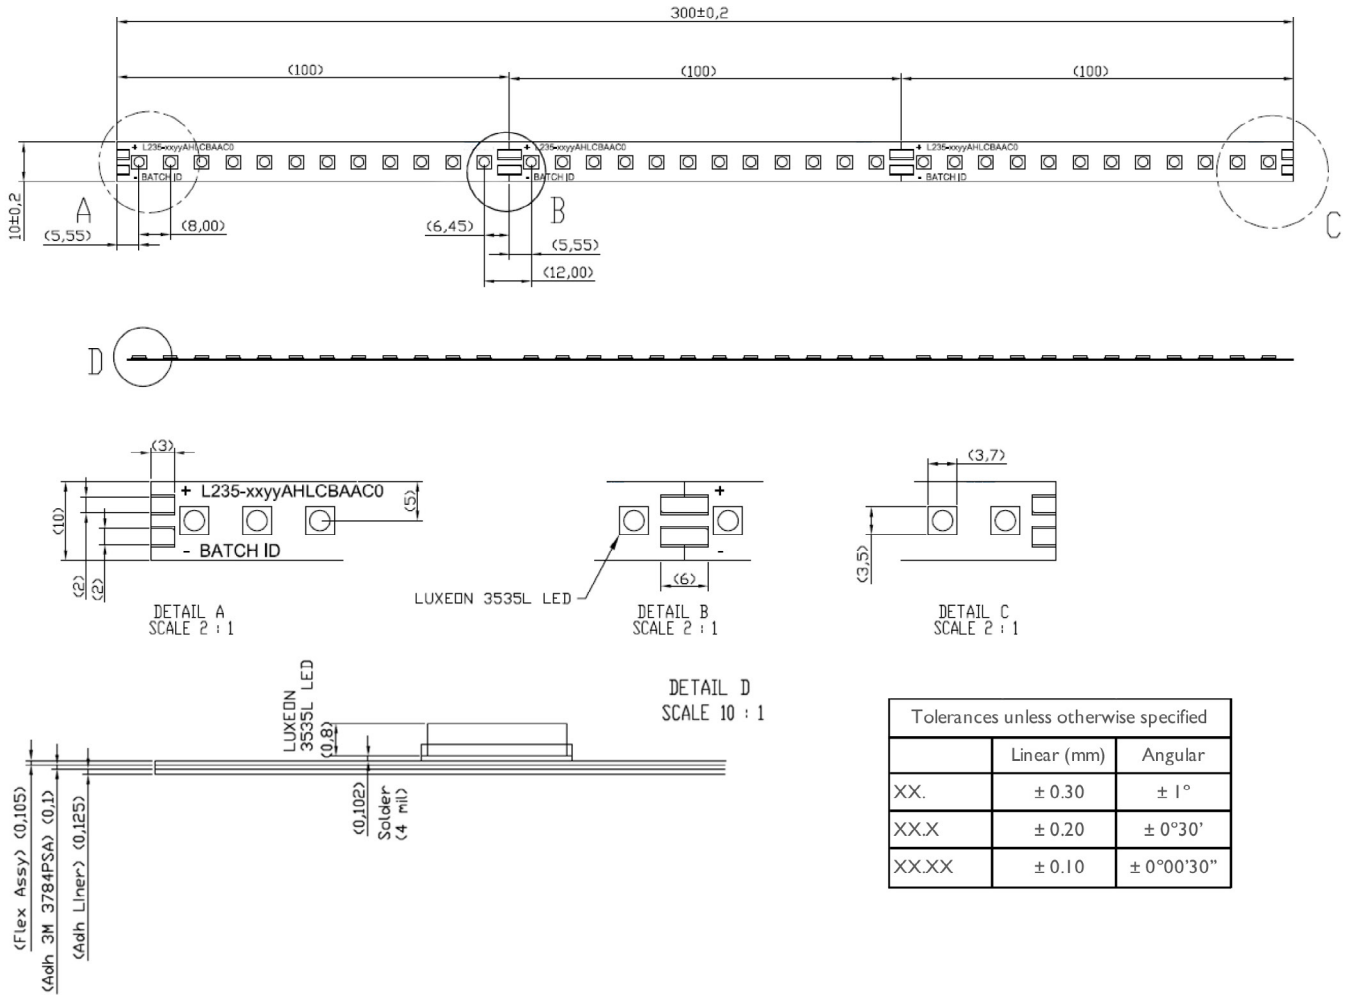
Mechanical drawing for L235-xyyyAHL CBAACO.
